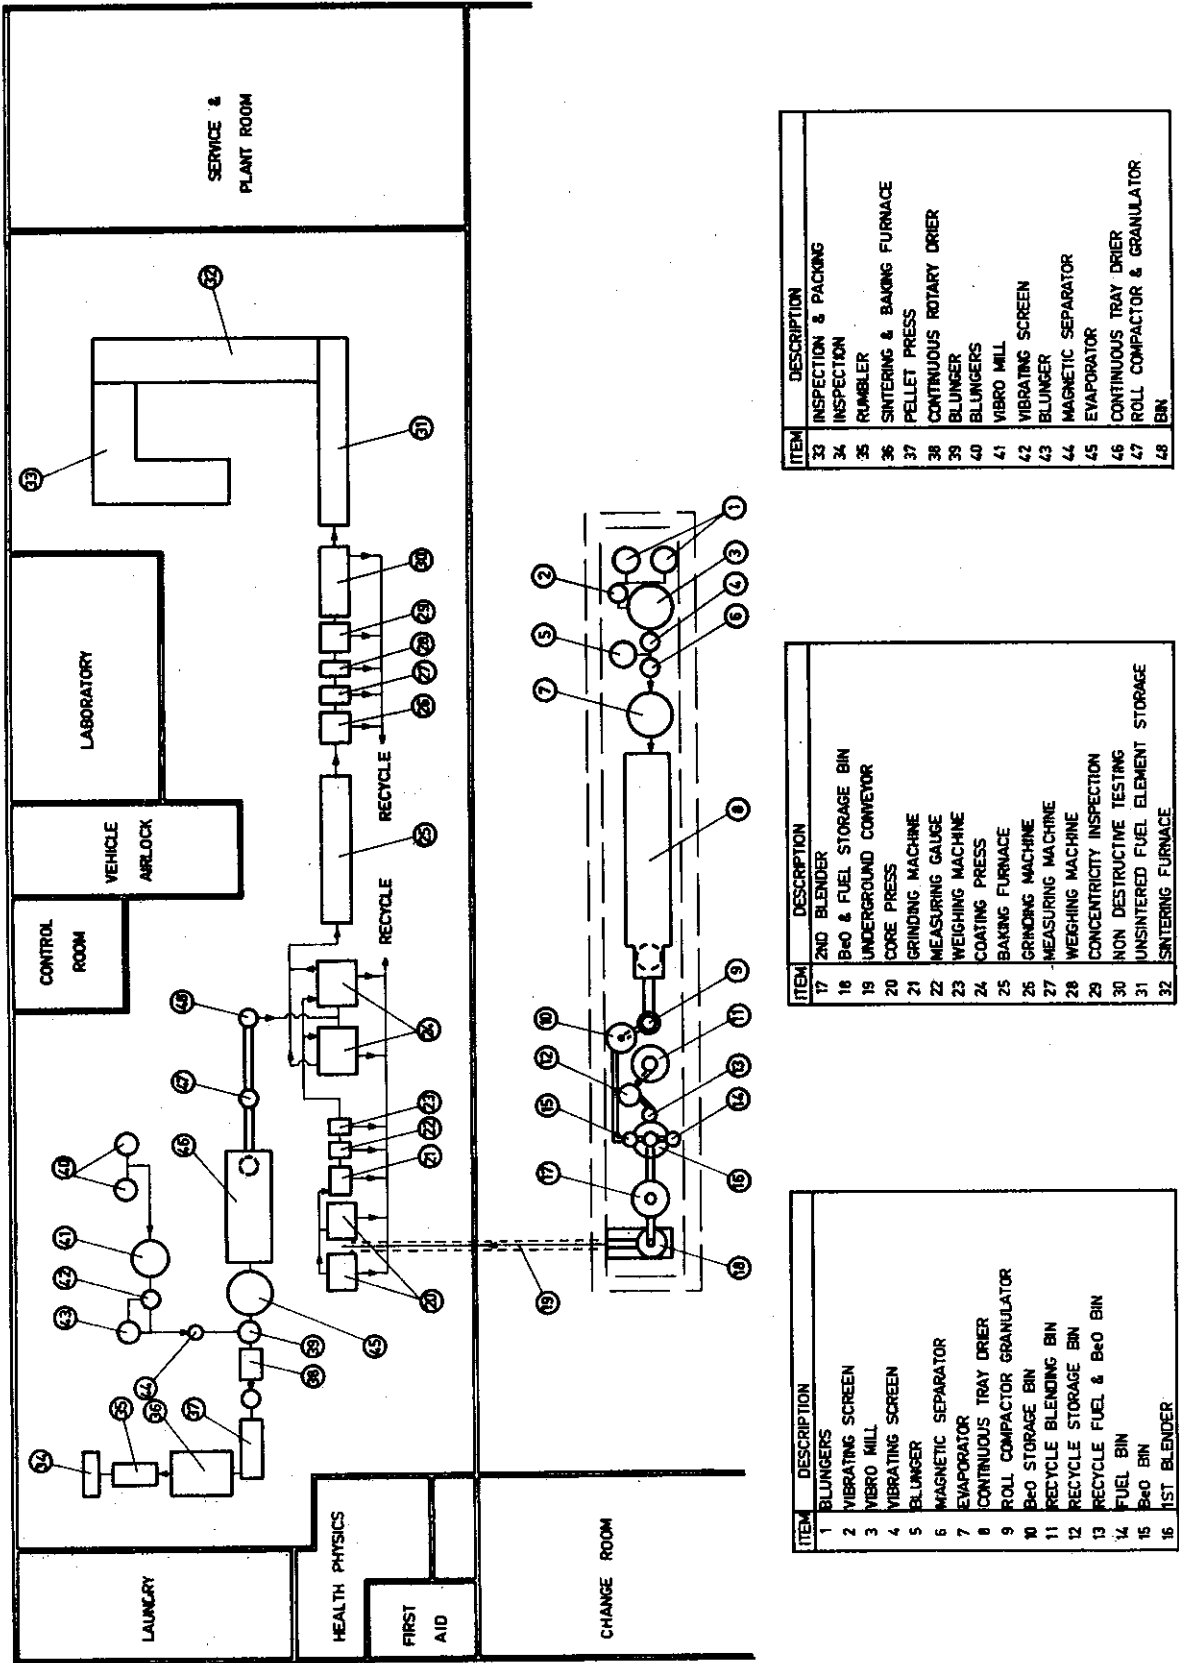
EQUIPMENT LAYOUT FOR HEAD END SIZE REDUCTION SECTION -
